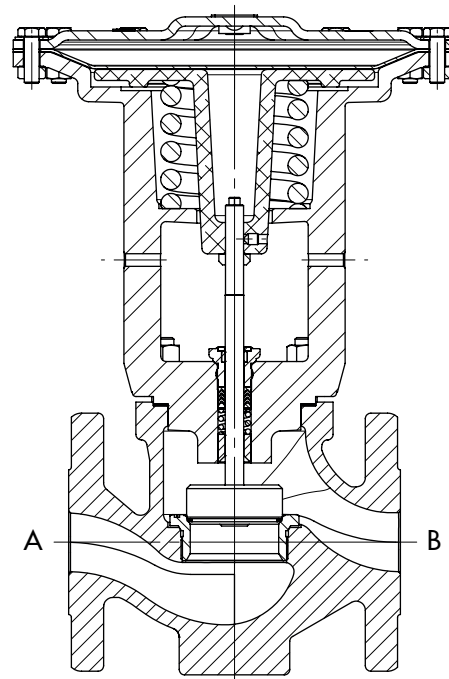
Type 3351 Pneumatic On/off Valve - Fail-open version
